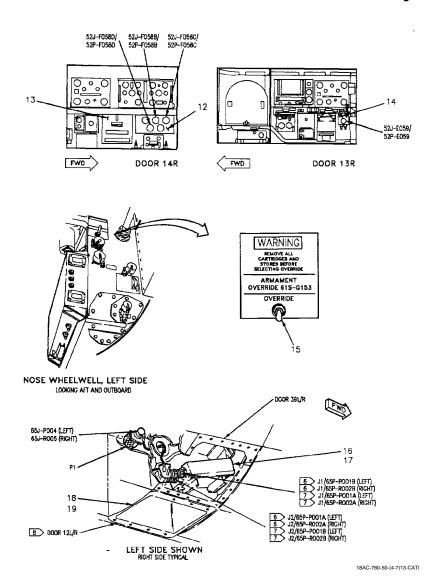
Countermeasures Dispensing System Locator (Sheet 7)
